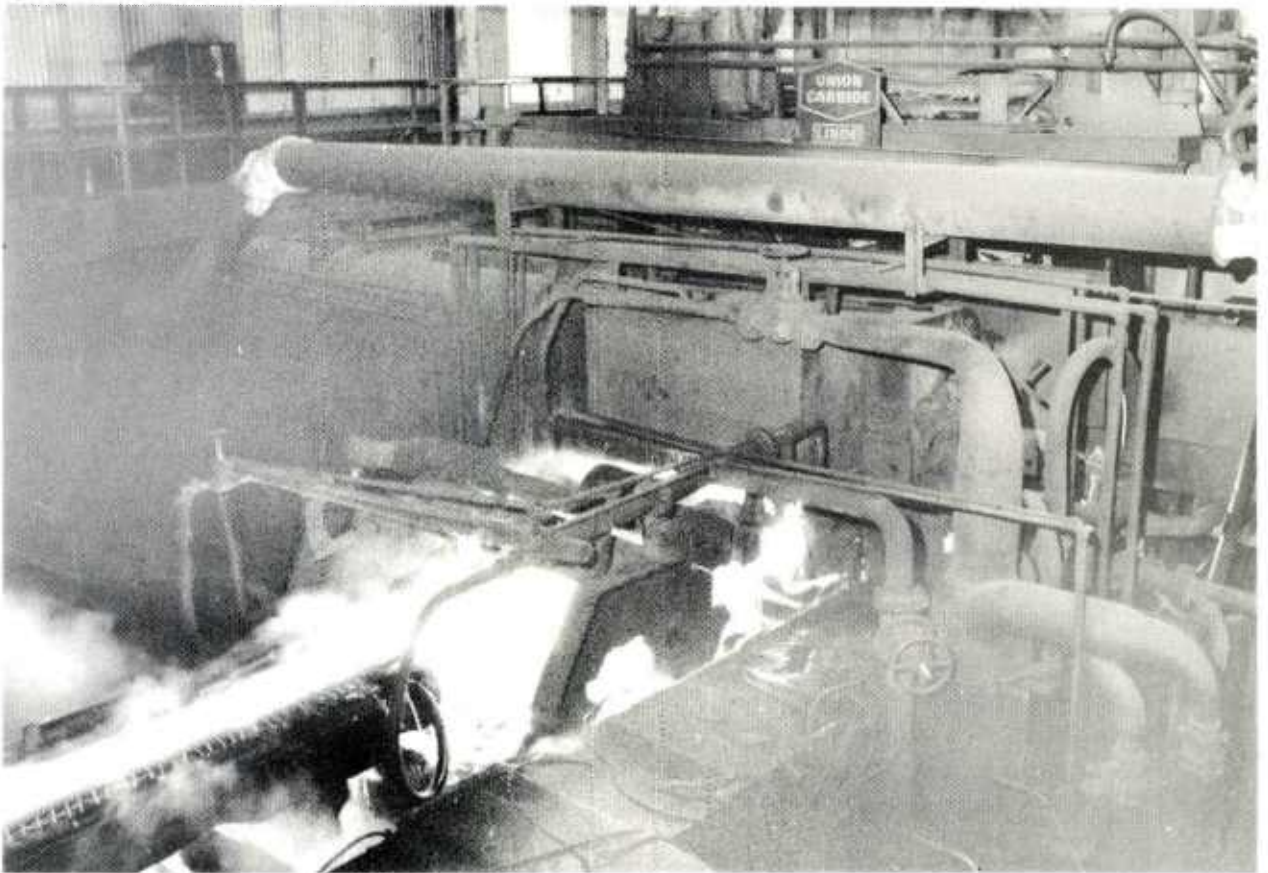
44 inch Scarfer Removing Surface Defects
